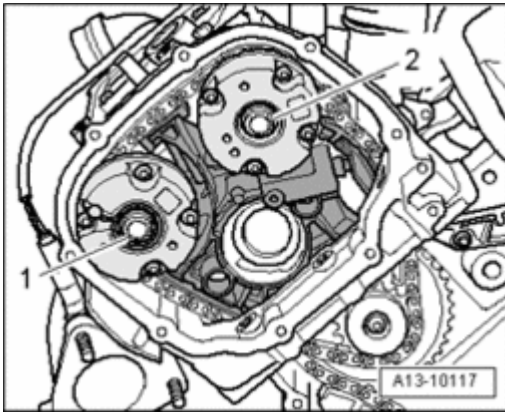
Removing/Installing Camshaft Adjuster Screws On Left Cylinder Head
